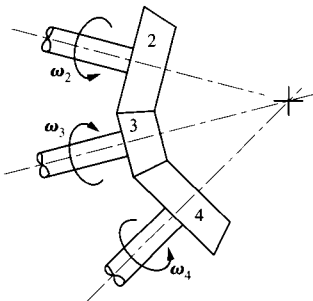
A simple gear train with external bevel gears and one idler (gear 3).
